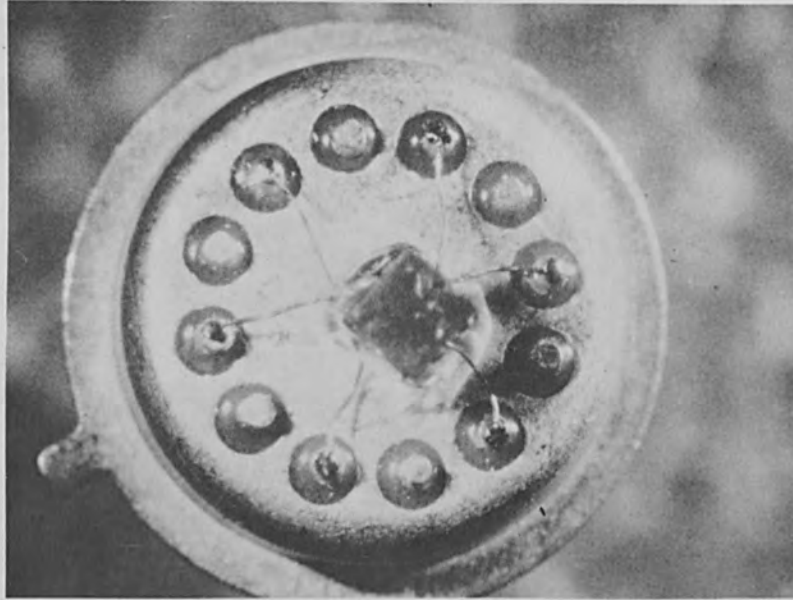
Miniature transformer laser welded to Kovar T-package.
